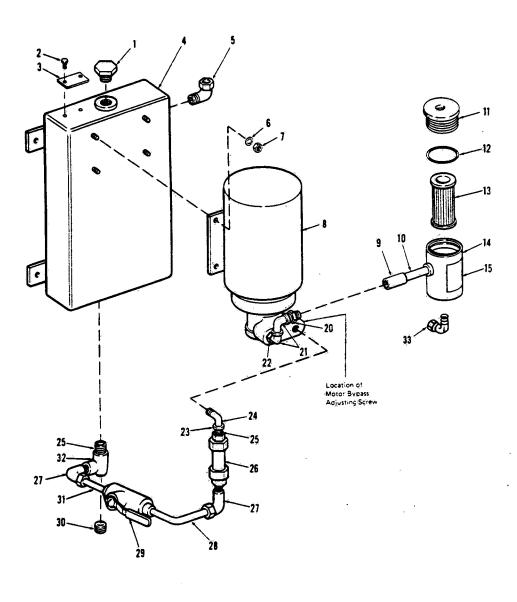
HYDRAULIC SUPPLY PACKAGE.
